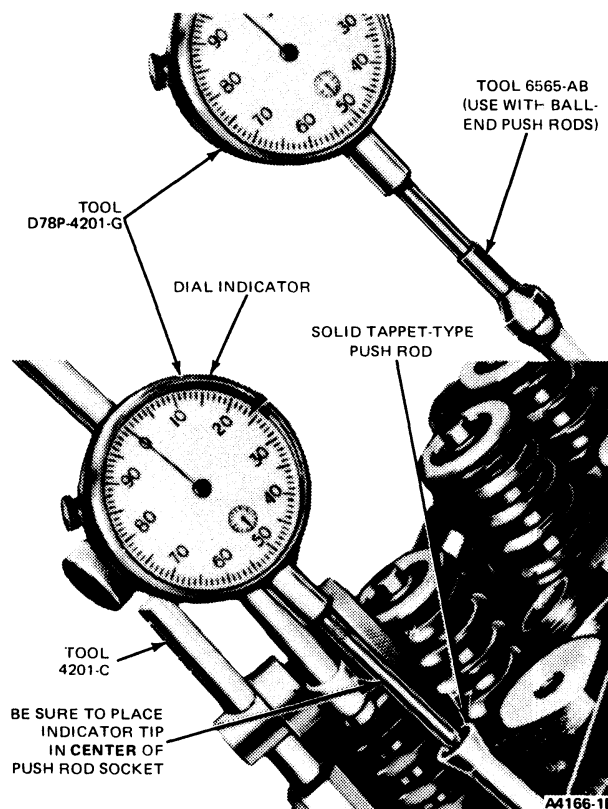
Typical Camshaft Lobe Lift Hydraulic Valve Lifters—V-8 Engines
